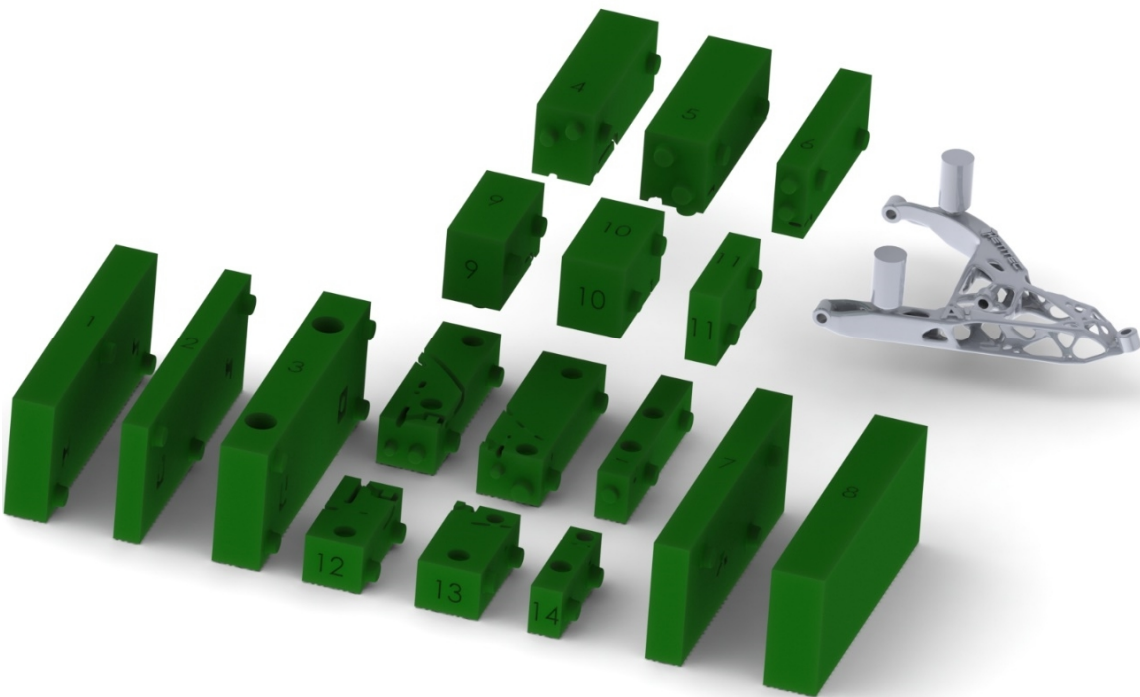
Exploded view of lower A-arm and mold version 2 sections
